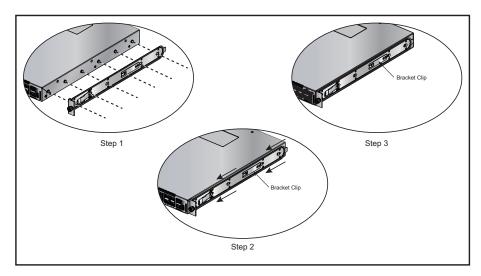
Attaching the Mounting Brackets to the Switch Chassis
